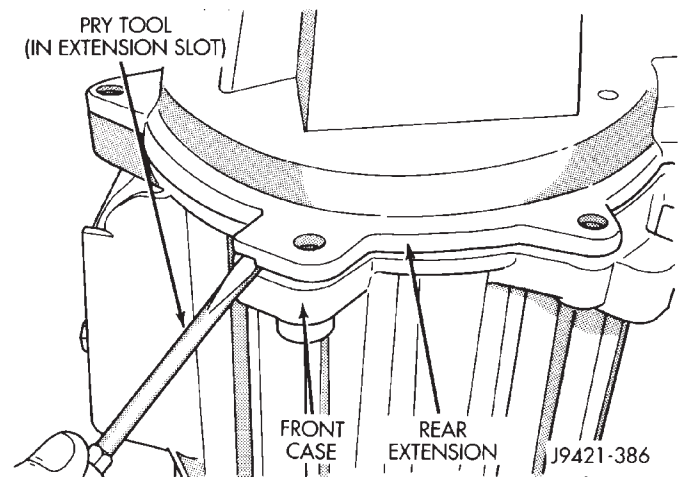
Loosening Rear Extension (Breaking Sealer Bead)
